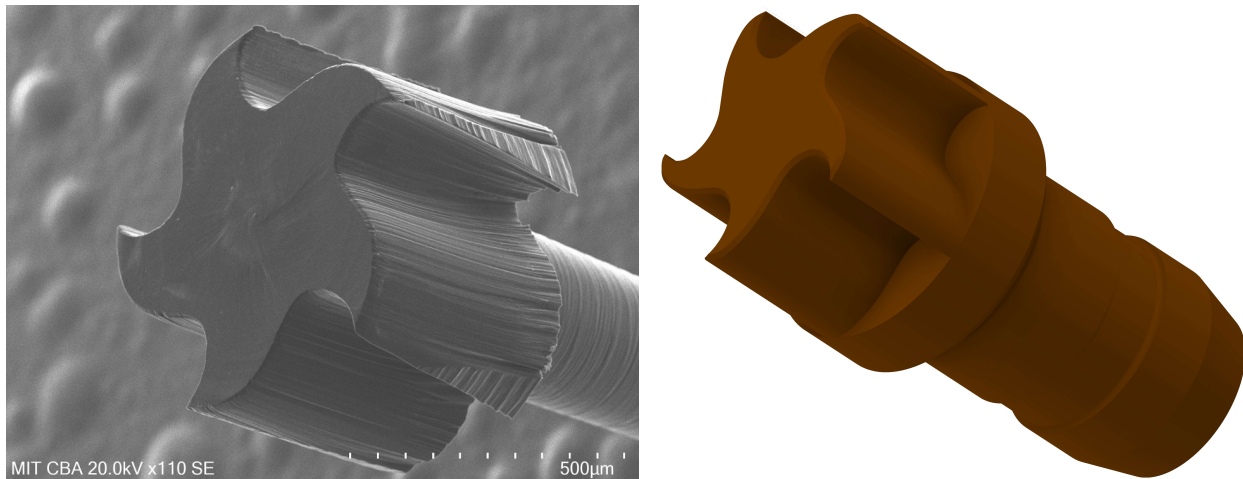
Drive tip machining progress. (Left) 0.7 mm CVD diamond drive tip fabricated via laser machining. (Right) CAD drawing of 0.7 mm Vespel drive tip for comparison.
